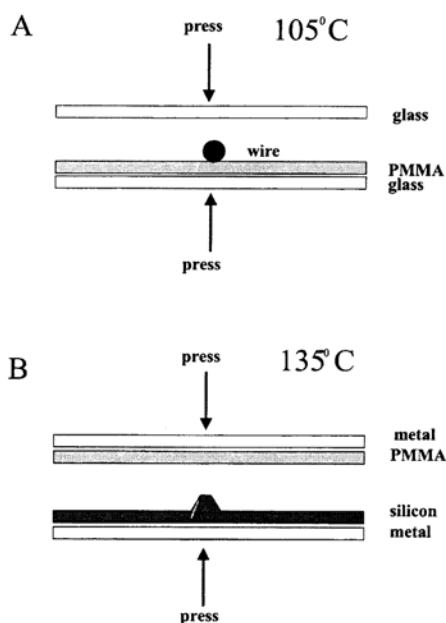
(A) Fabrication process for wire-imprinted devices, (B) Fabrication process for silicon-template-imprinted devices¹³
